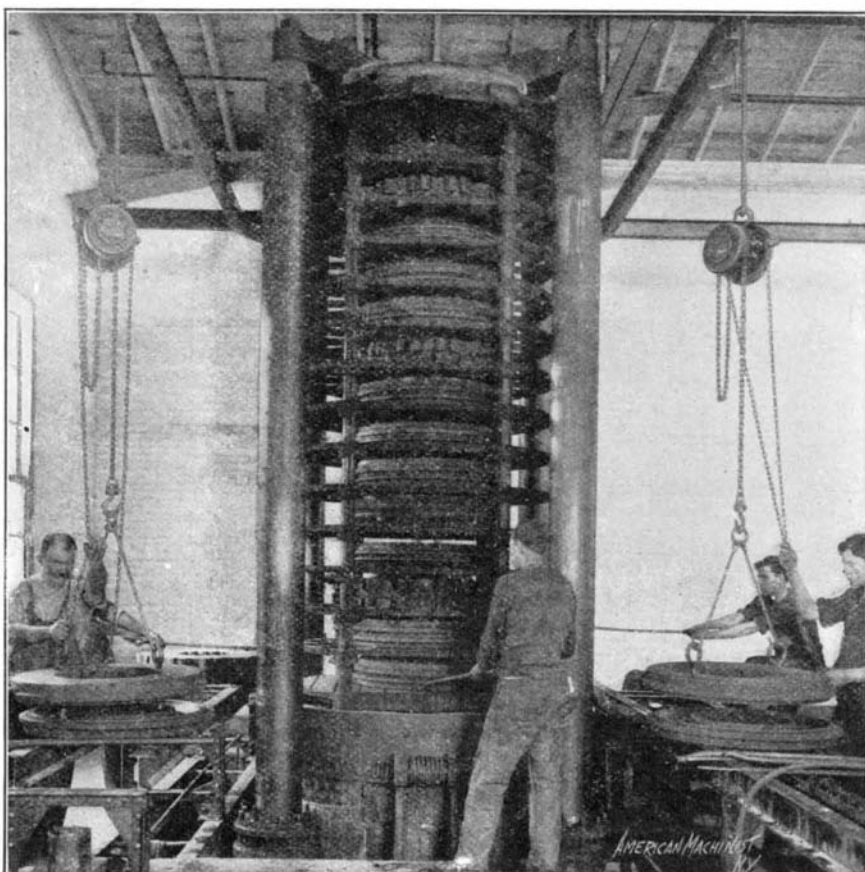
THE VULCANIZING PRESS AND MOLDS.
